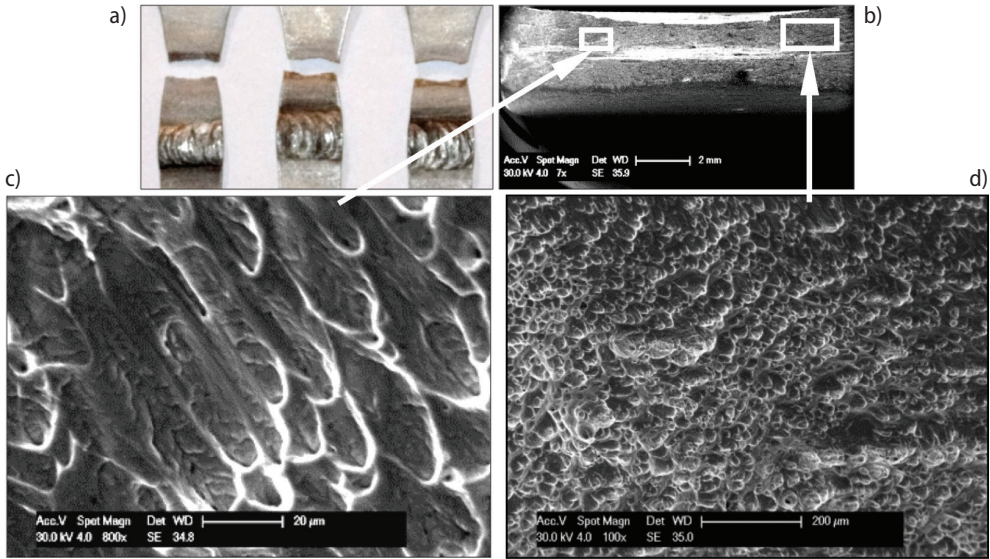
Static fractures (a) and microstructure of the TIG welds after static tensile test (b), (c), (d)
